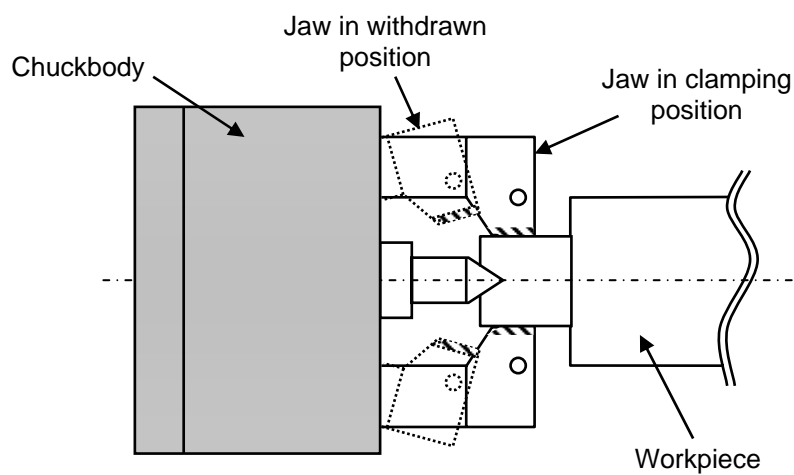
Working principle of shaft chuck for turning with retractable jaws.
